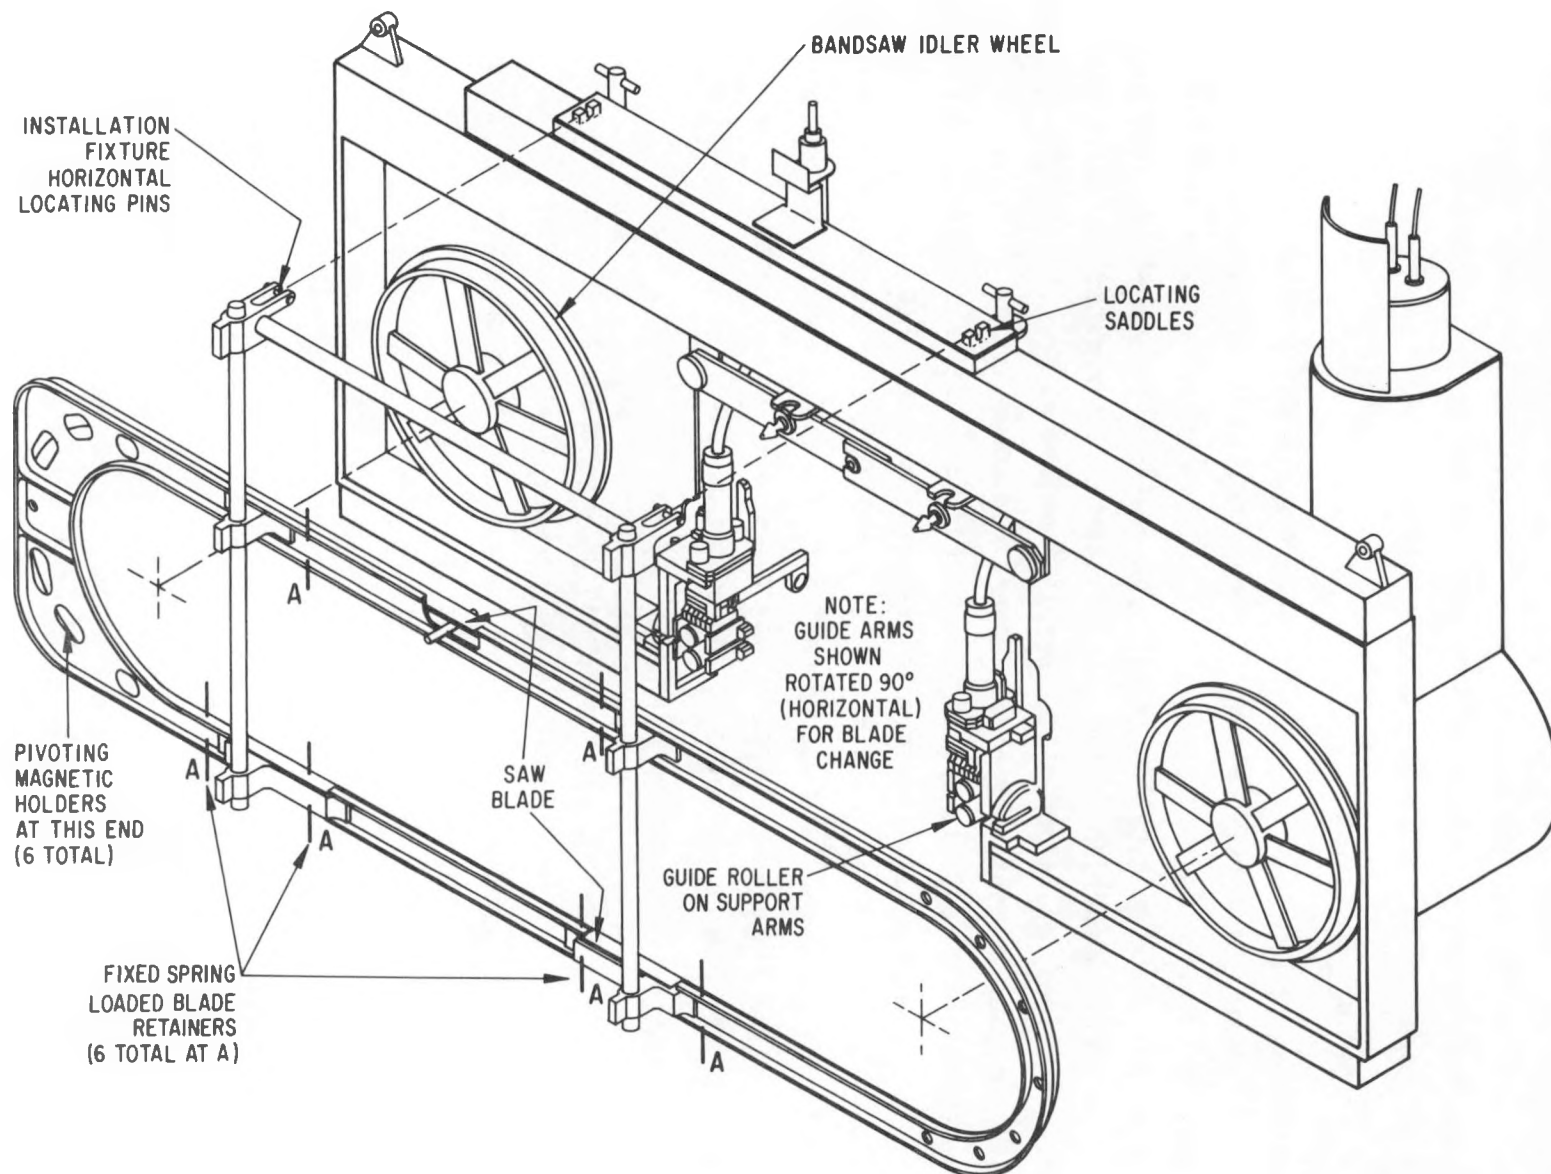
LWBR COS Bandsaw Blade Installation Fixture
